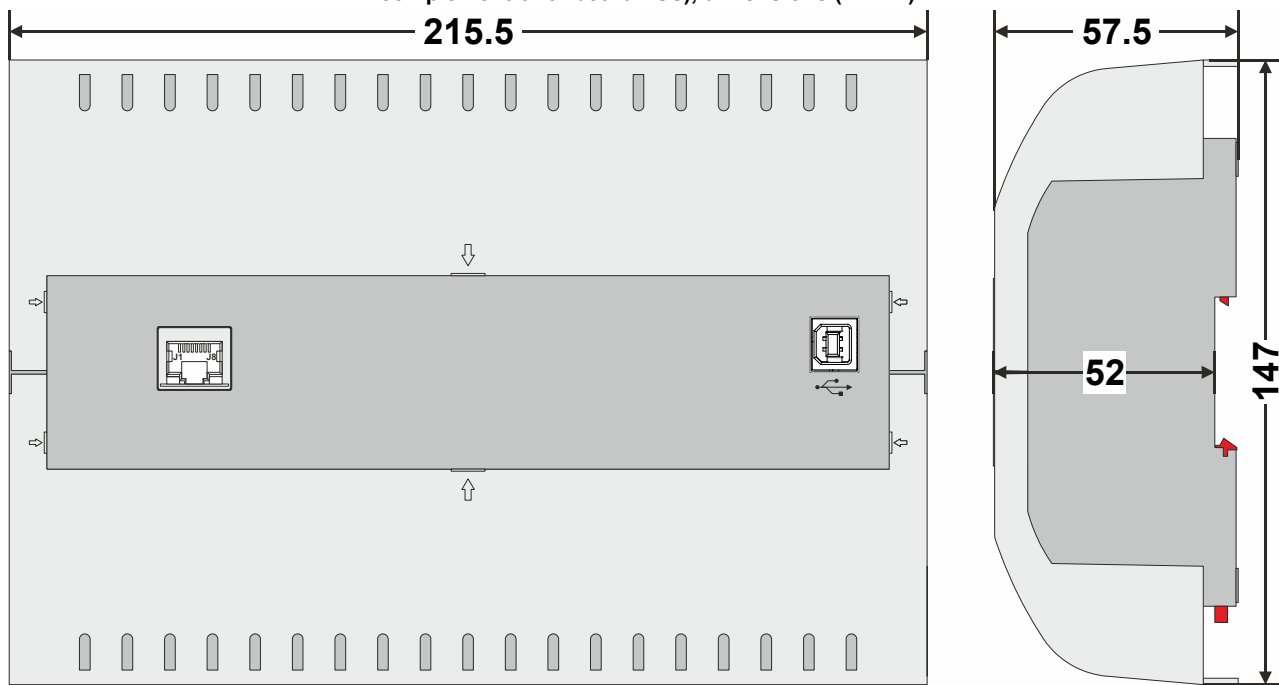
EAGLEHAWK NX controller with covers, dimensions (in mm)
